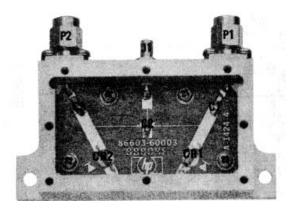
A17 Phase Modulator Assembly Component Locations (Change C)
